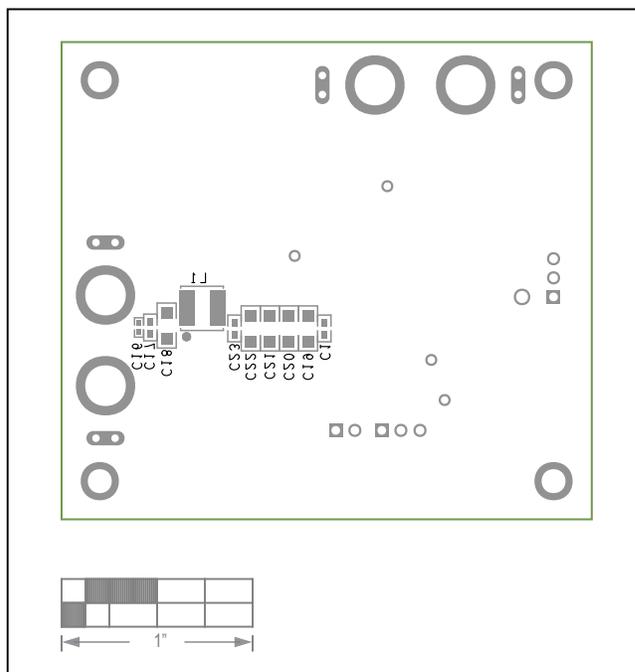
MAXM17536 5V Output EV Kit PCB Layout—Bottom Silkscreen
